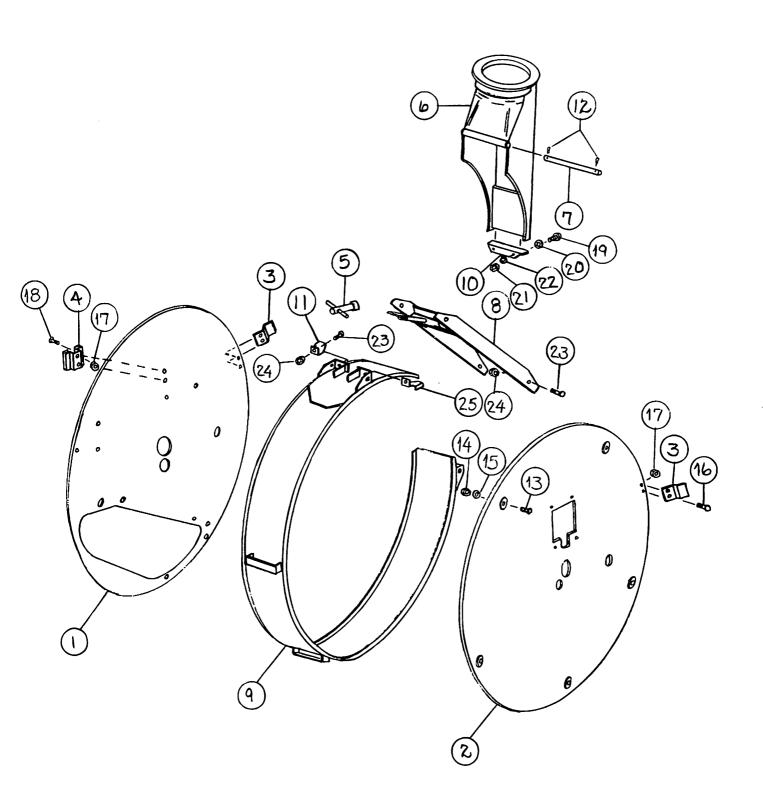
H&S 860 BLOWER ROTOR HOUSING
